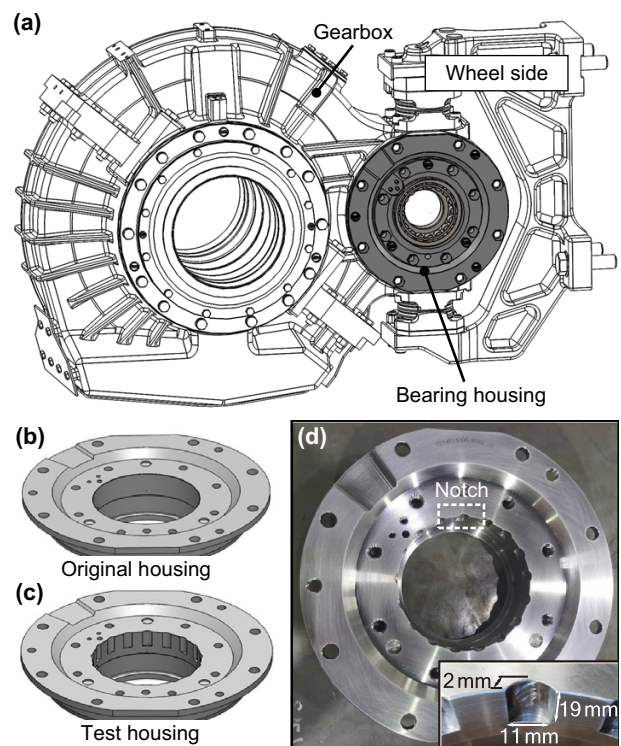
Test gearbox structure and high-speed shaft bearing configuration
